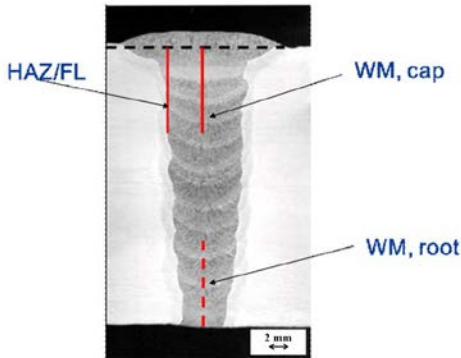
Girth weld showing notch locations for SENT specimens.
